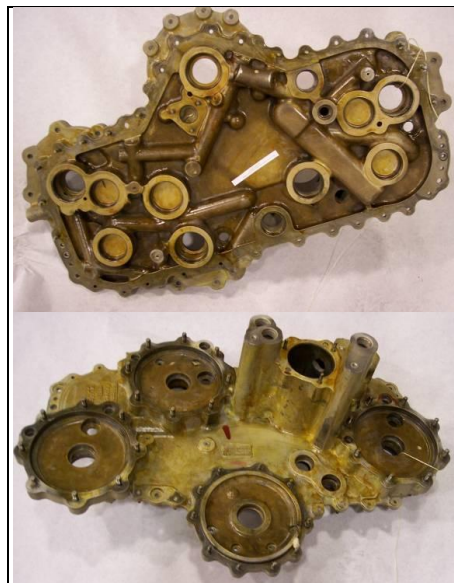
UH-47 magnesium component (as received). Upper left: front side of UH-47 accessory cover. Lower left: back side of UH-47 fan impeller.
